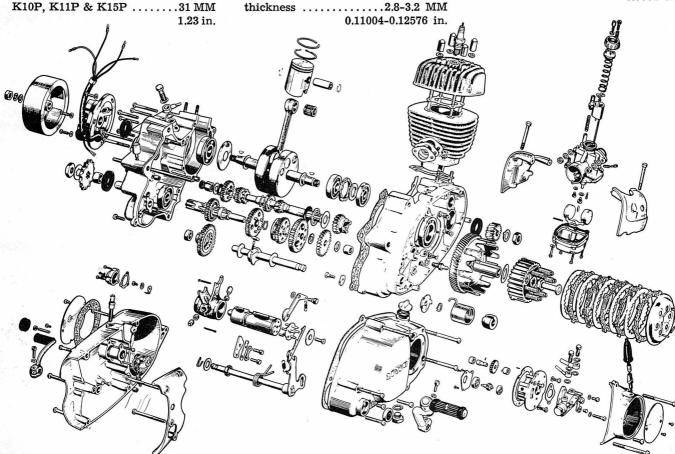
Exploded view of the engine and transmission assembly used on K10P, K11P and K15P models. Other models are similar.
